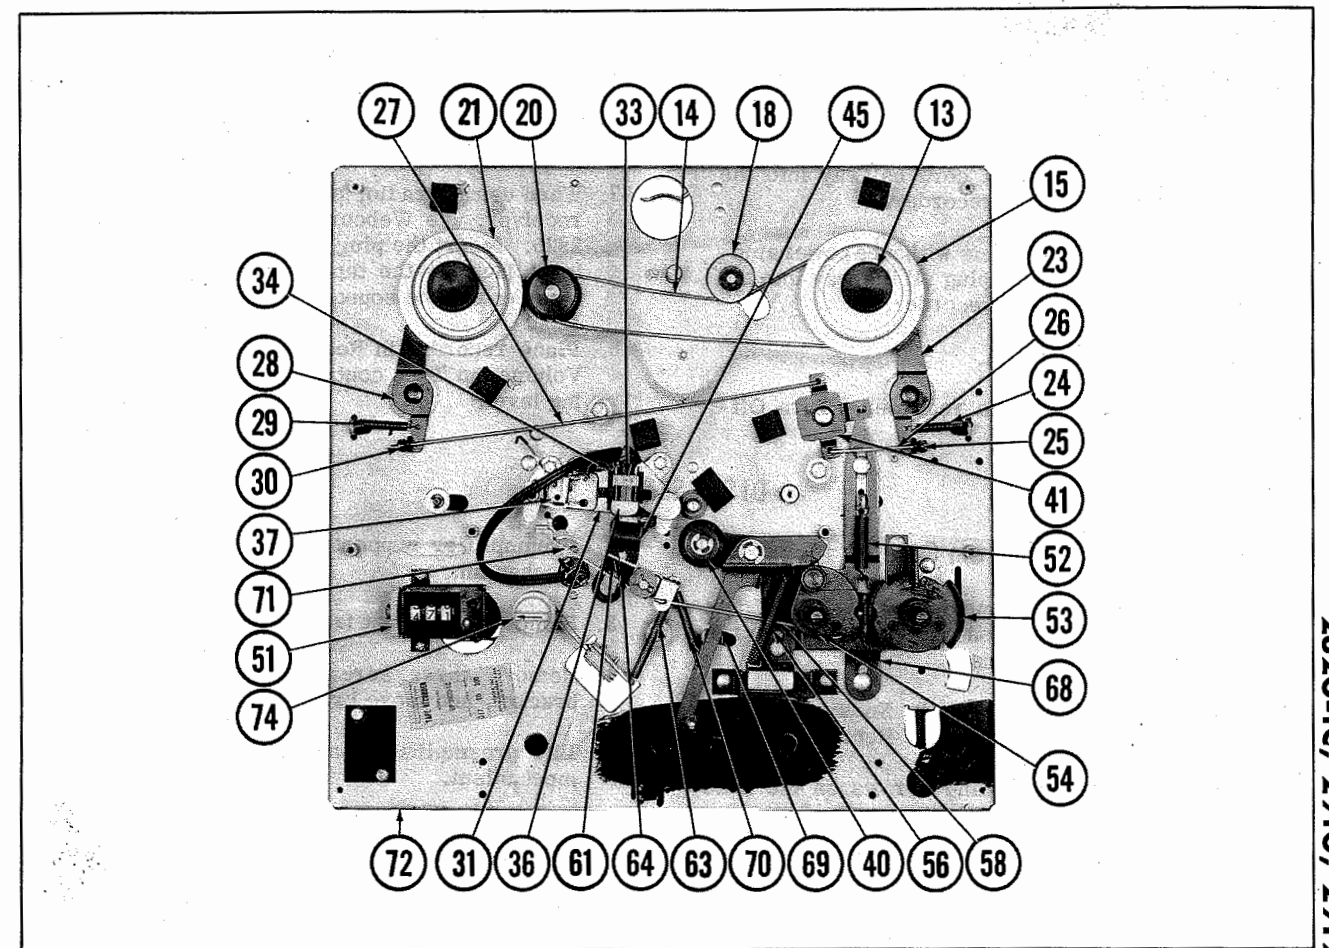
TOP VIEW OF MECHANISM WITH ESCUTCHEON REMOVED
